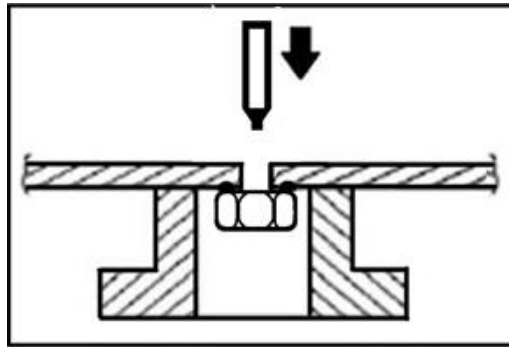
Principle of testing of projection welded nuts (Projeksiyon kaynaklı somunların test prensibi)
